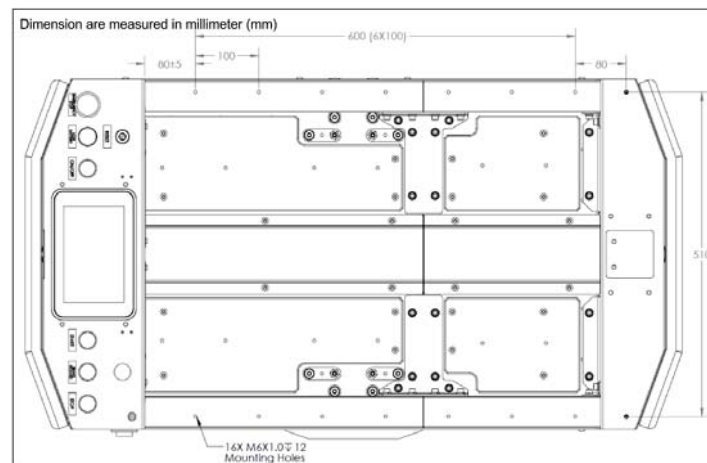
Payload Handling Module Mounting Holes for Zalpha With Extension Module
